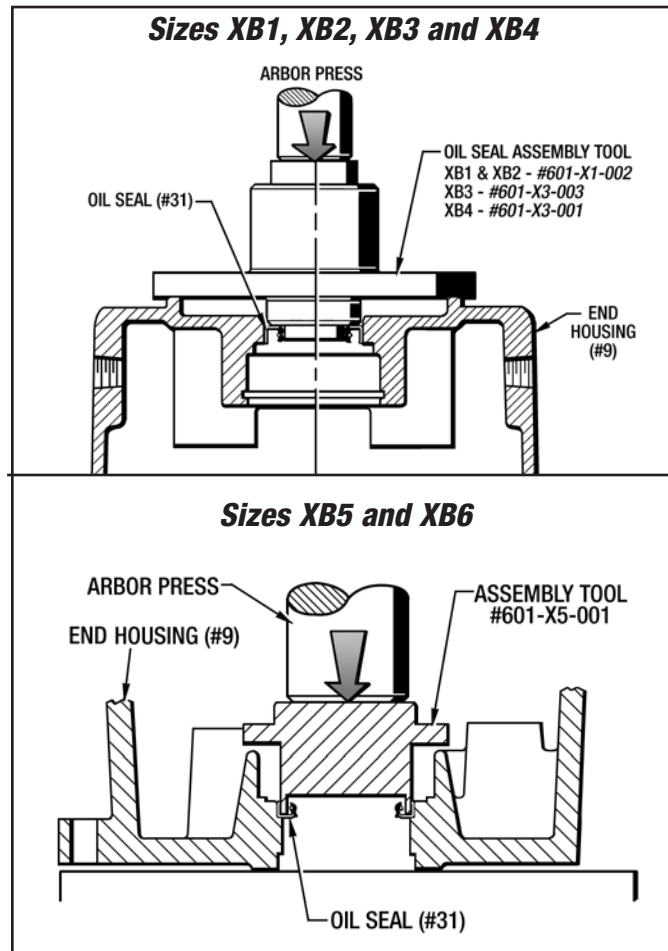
Installing Oil Seal (#31) in a Coupler Brake
